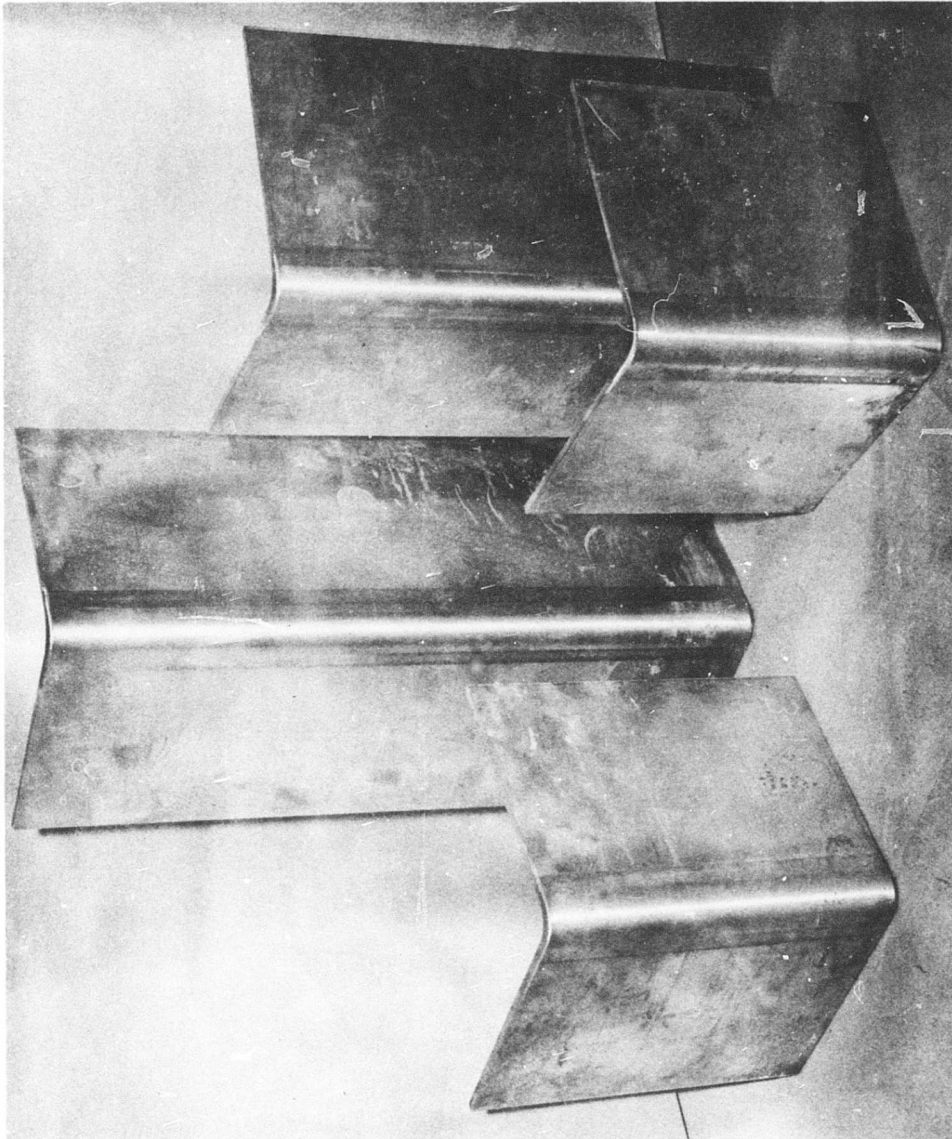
Wide Bend Specimens, Using $3/4$ " Bend Radius.
